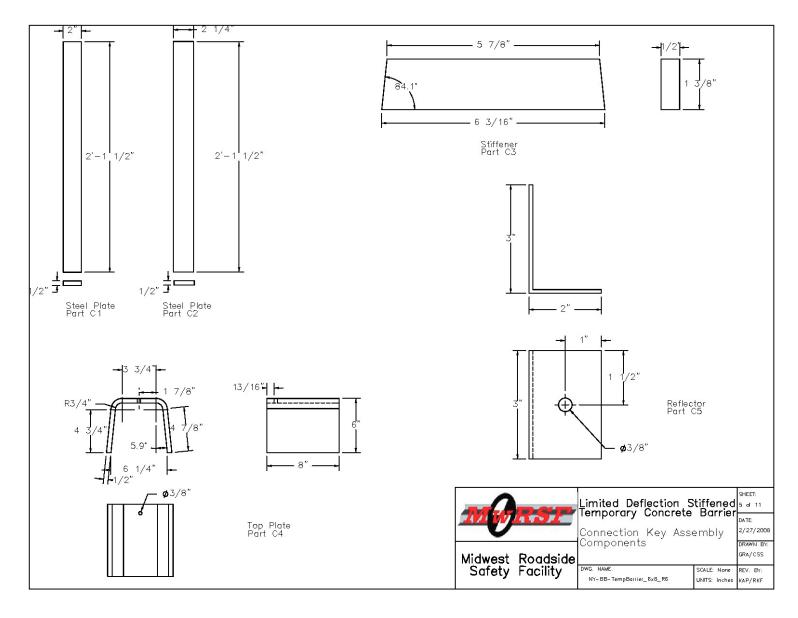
Connection Key Assembly Details (English), Test NYTCB-3
